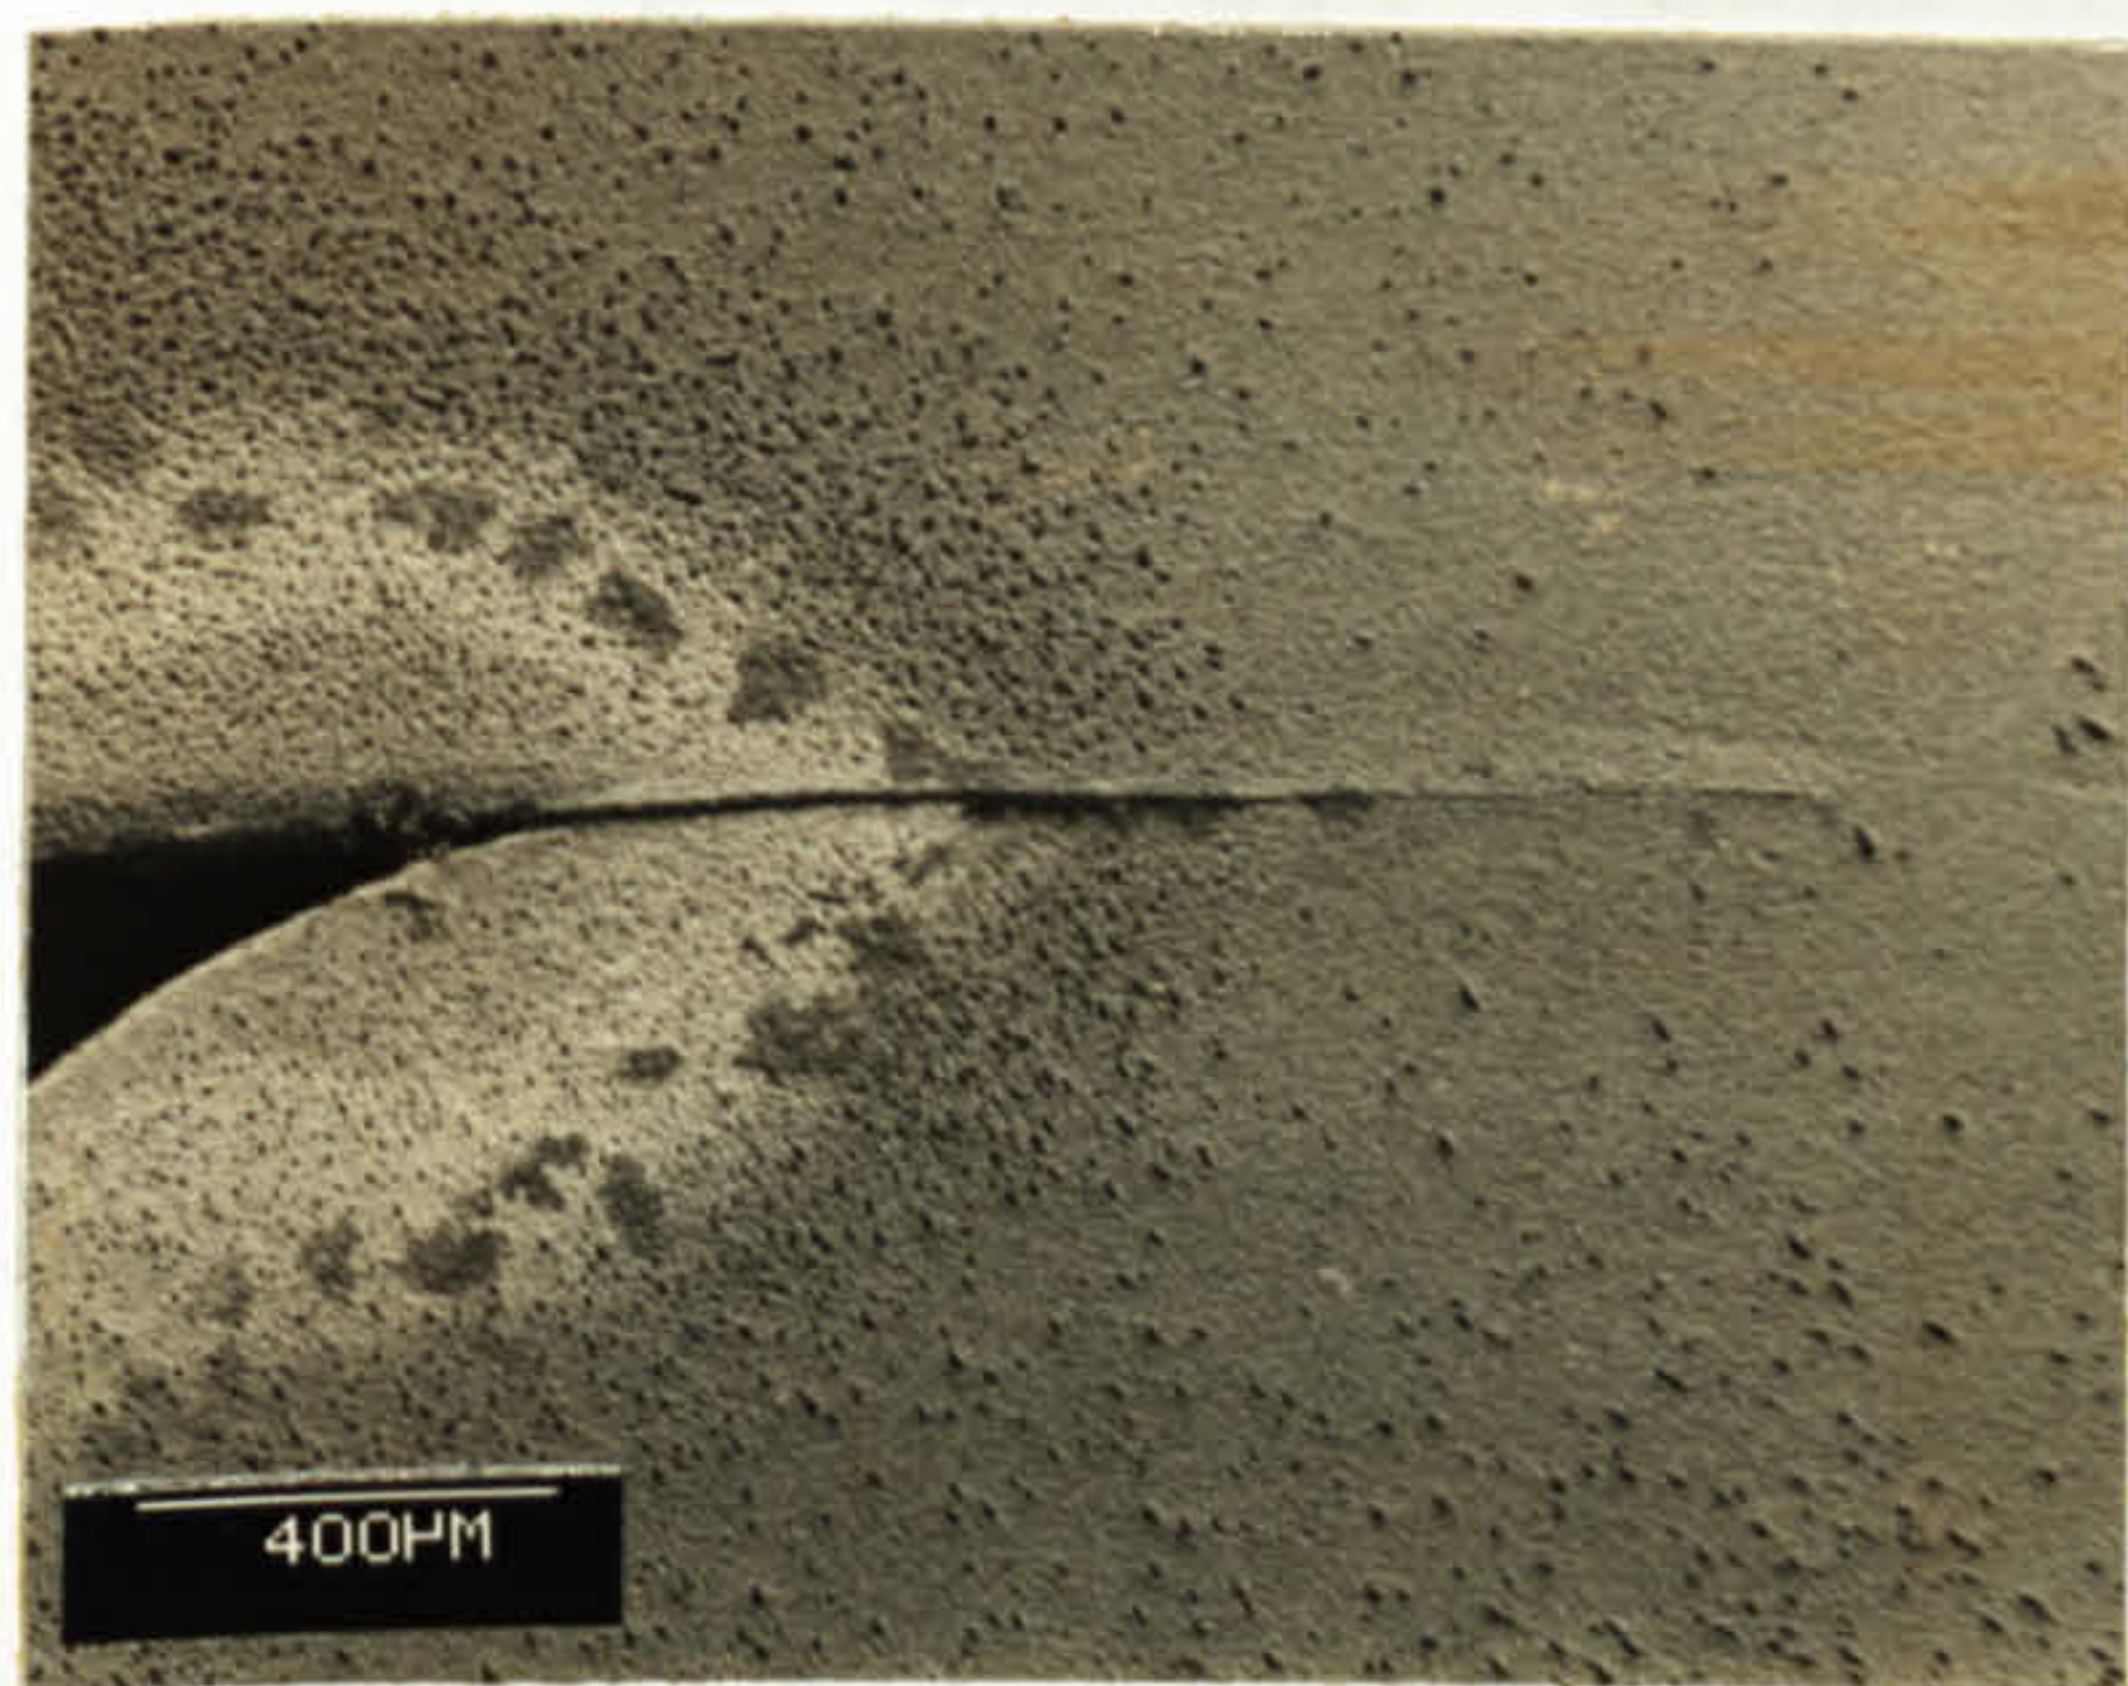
Photomicrograph showing the pipe failure remote from the internal weld removed region.
